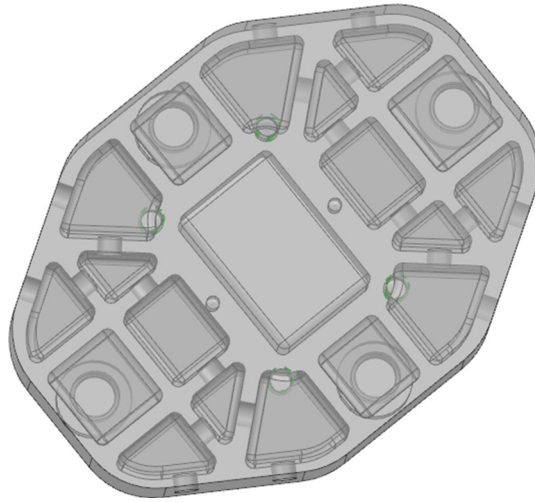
CAD model of an additively manufactured aluminum mirror.
